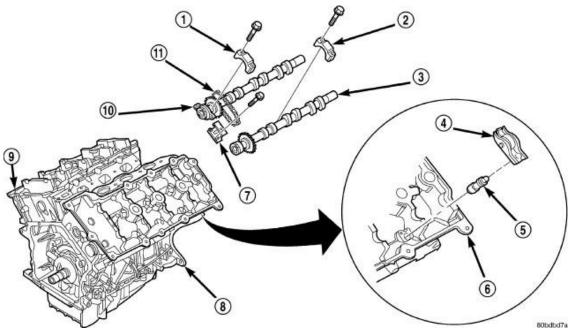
Camshaft & Valvetrain Components Courtesy of CHRYSLER LLC
